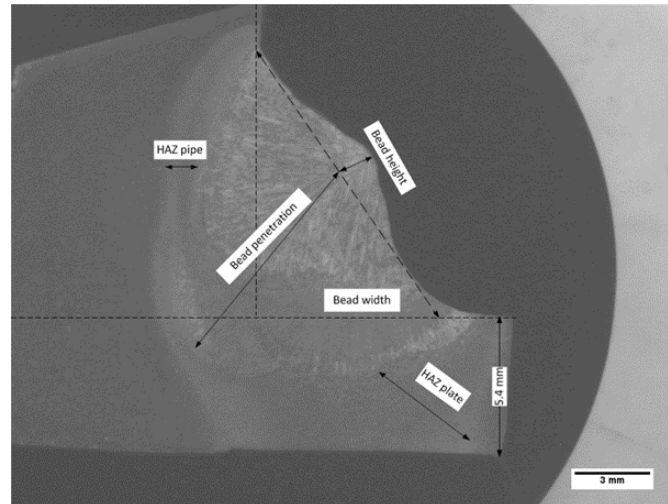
A stereo macrograph showing a sample sectioned from the welded specimen
